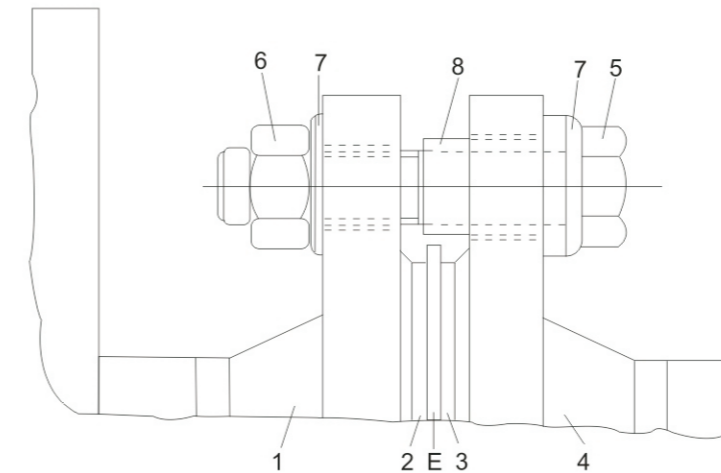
Insulated Bolts in Cathode Protected Tube E-earth ring;
